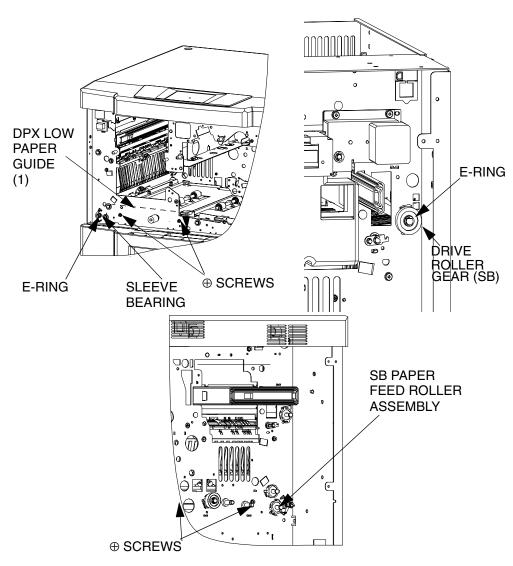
Removal of the SB Paper Feed Roller Assembly
